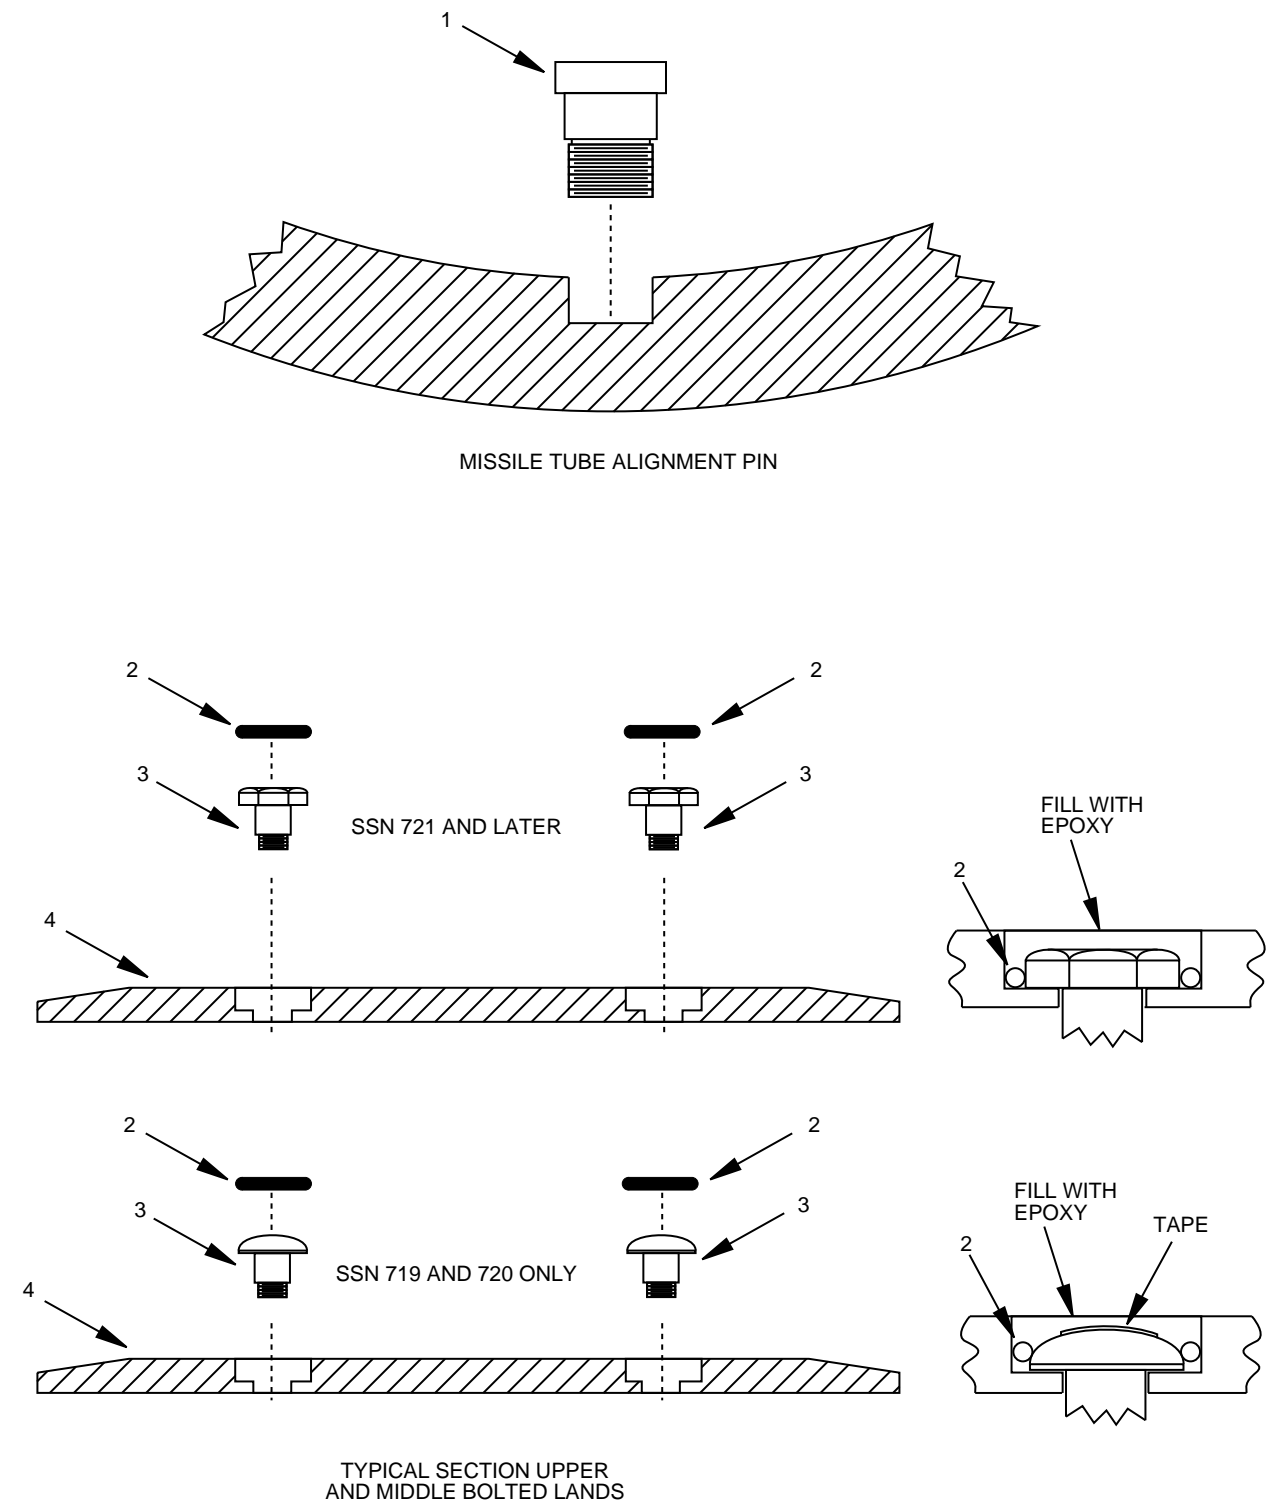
Missile Tube Shock Lands and Alignment Pins
